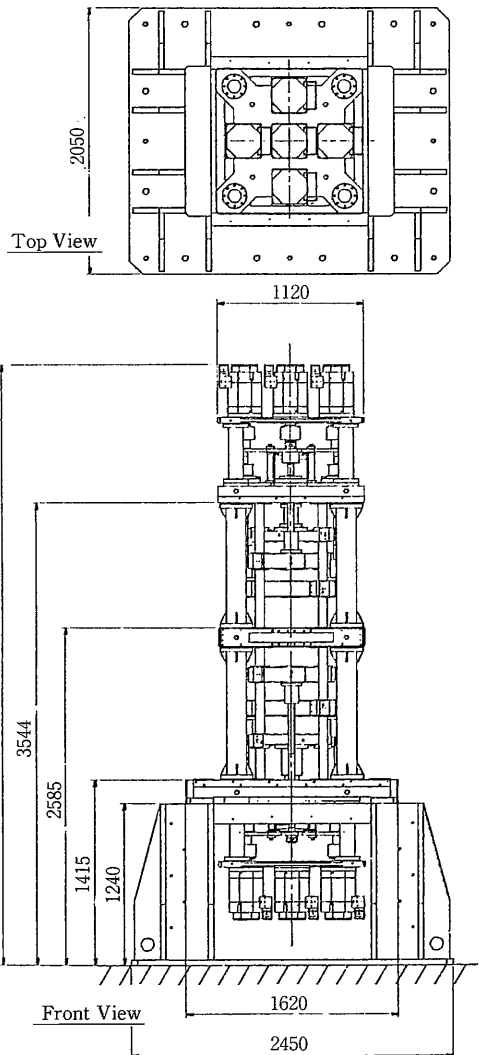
Final Design of the 6-axis Electric Drive CNC Press
